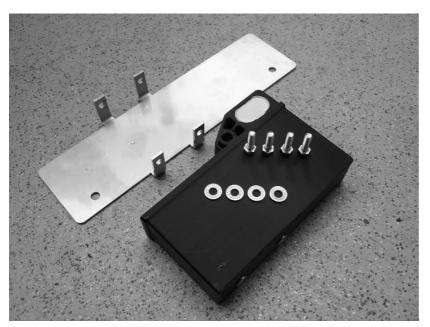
The parts of the sensor required for pre-assembly, consisting of the mounting plate, the sensor, the M5 screws and the associated locking washers.
